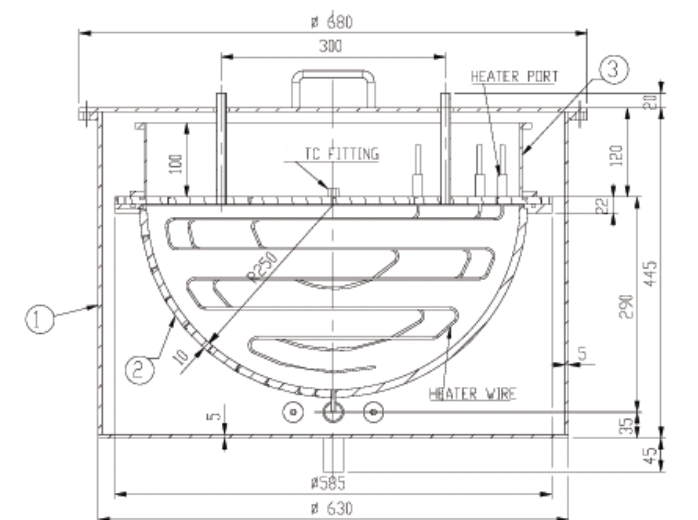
Detailed drawing of the SIGMA 3D test section.
